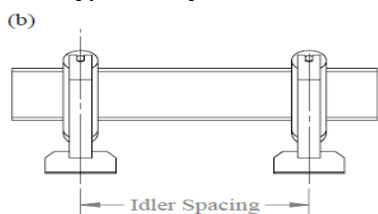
Typical arrangement of carry idlers in a typical belt conveyor system.
